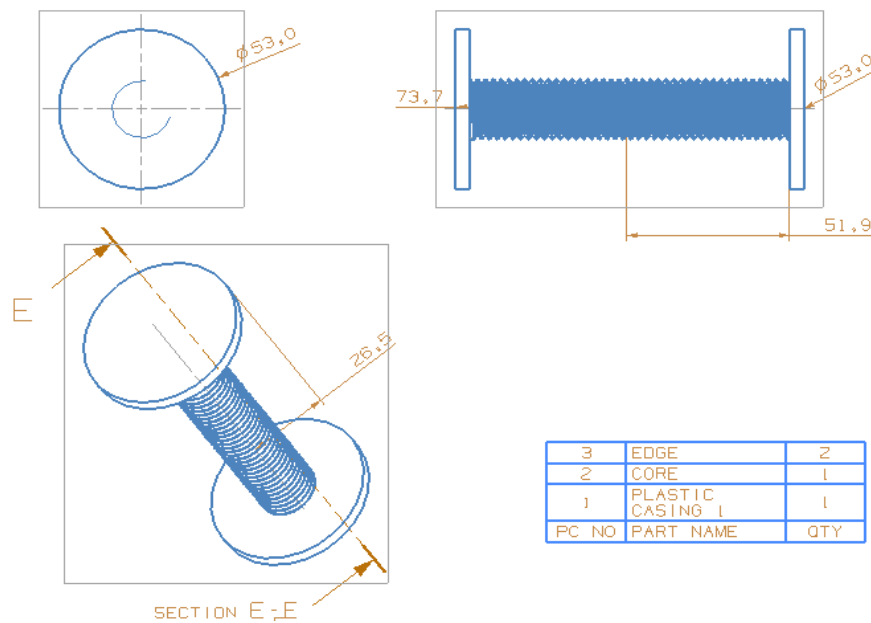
I-bar Magnet Used for the Electromagnetic Engine
